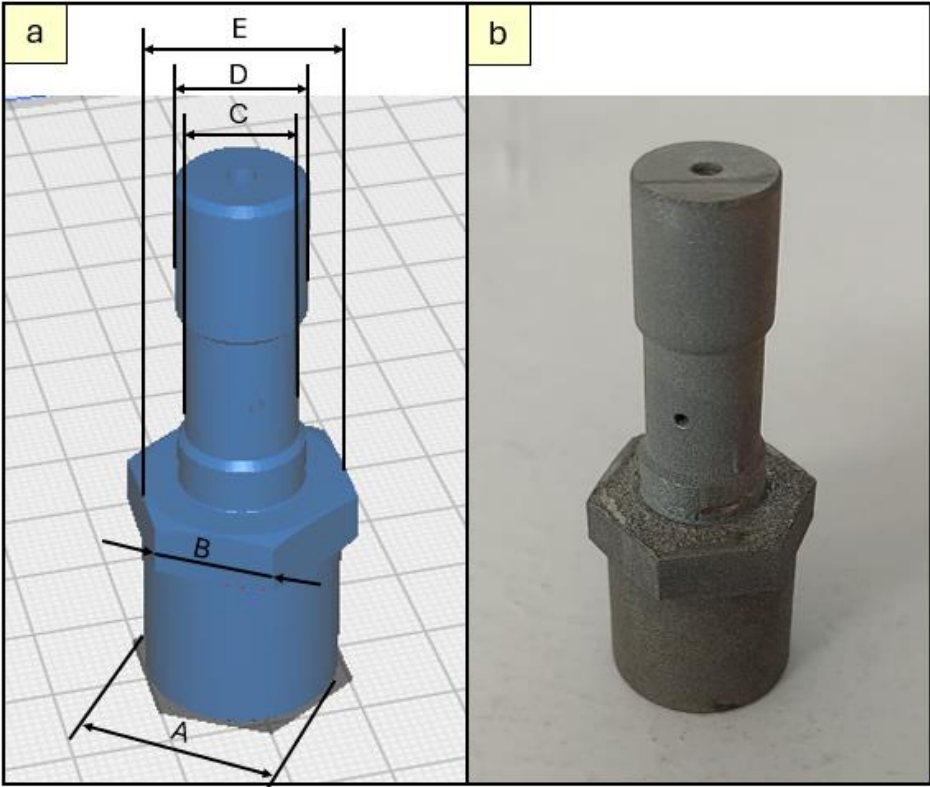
a) Connector CAD drawing (© Leonardo S.p.A.) b) Connector perspective.
